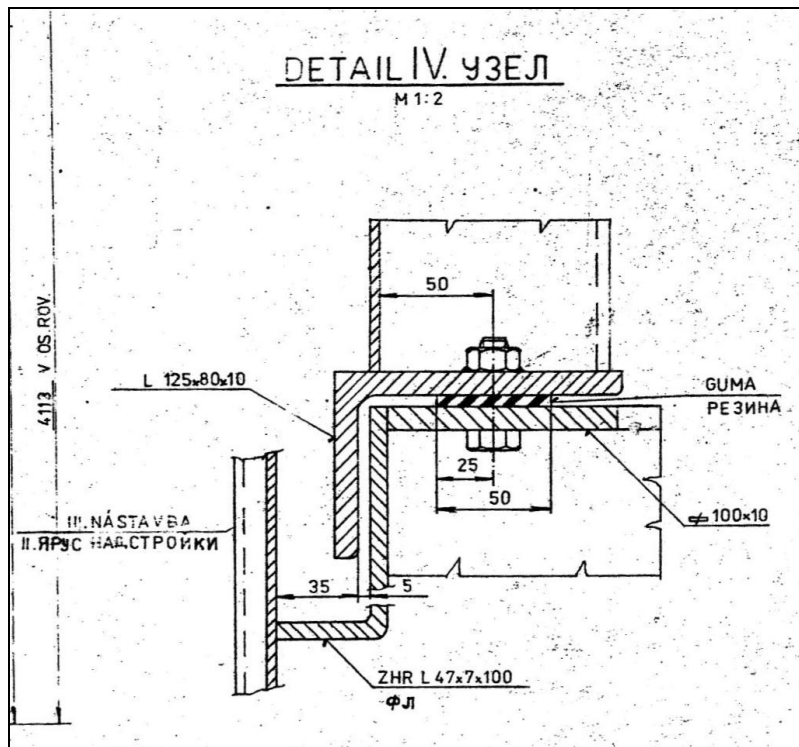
TYUMEN-2, detail drawing, wheelhouse/deck house connection
